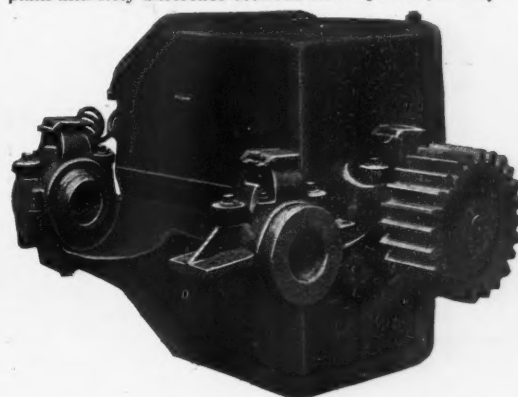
Motor Complete, Showing Axle Brackets and Pinion.
